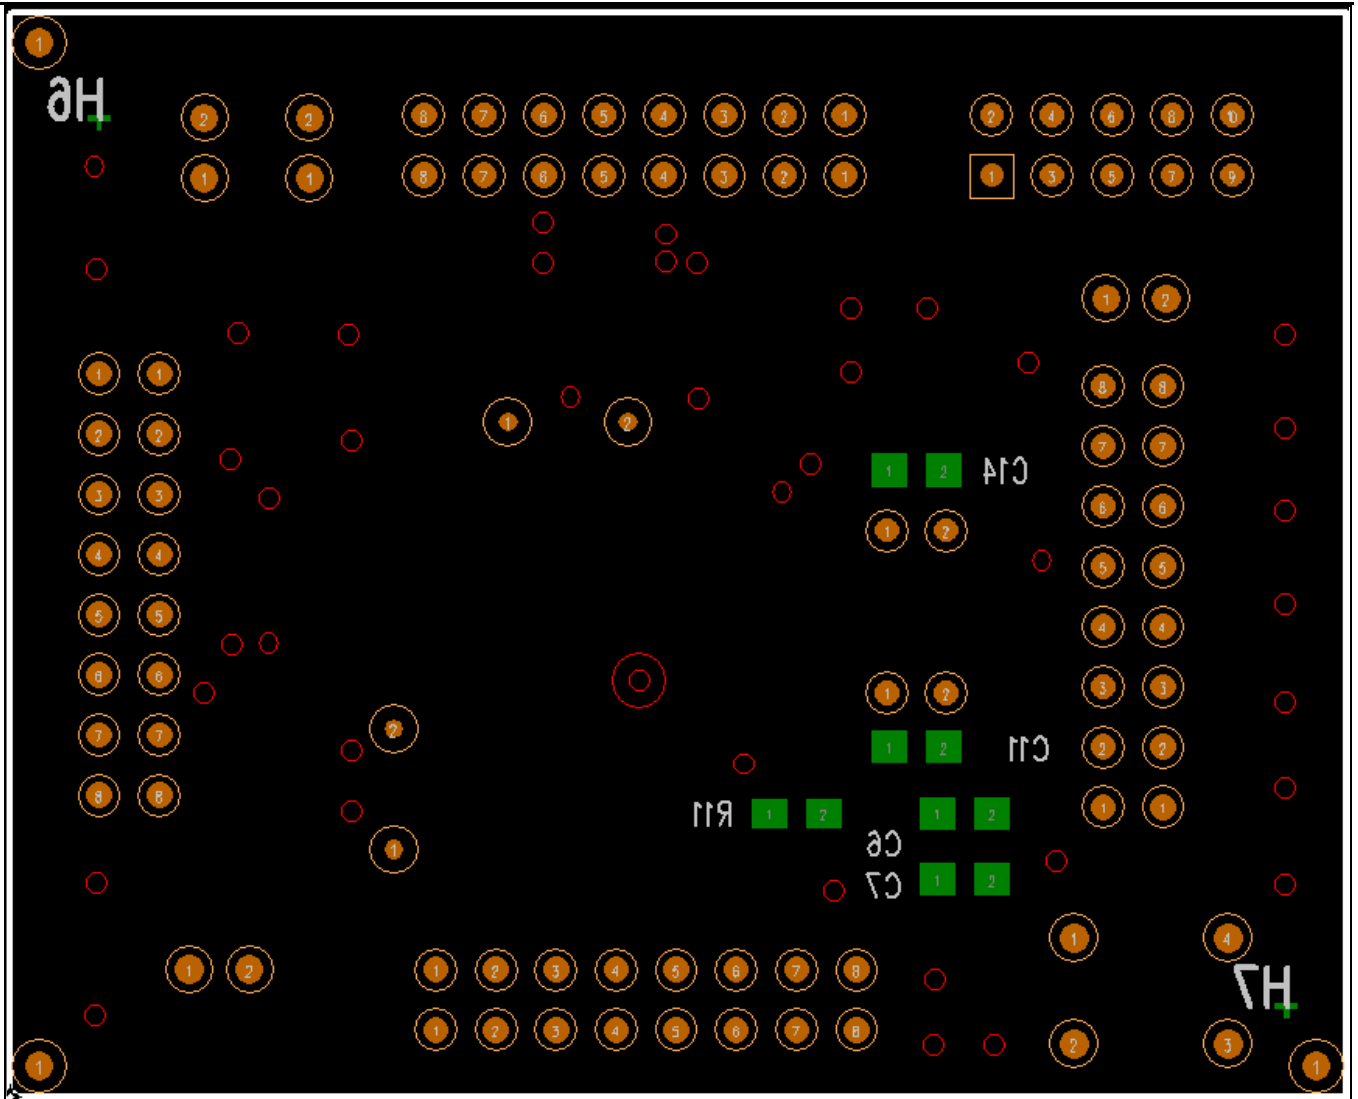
IS31CS8964 Evaluation Board Component Placement Guide - Bottom Layer
